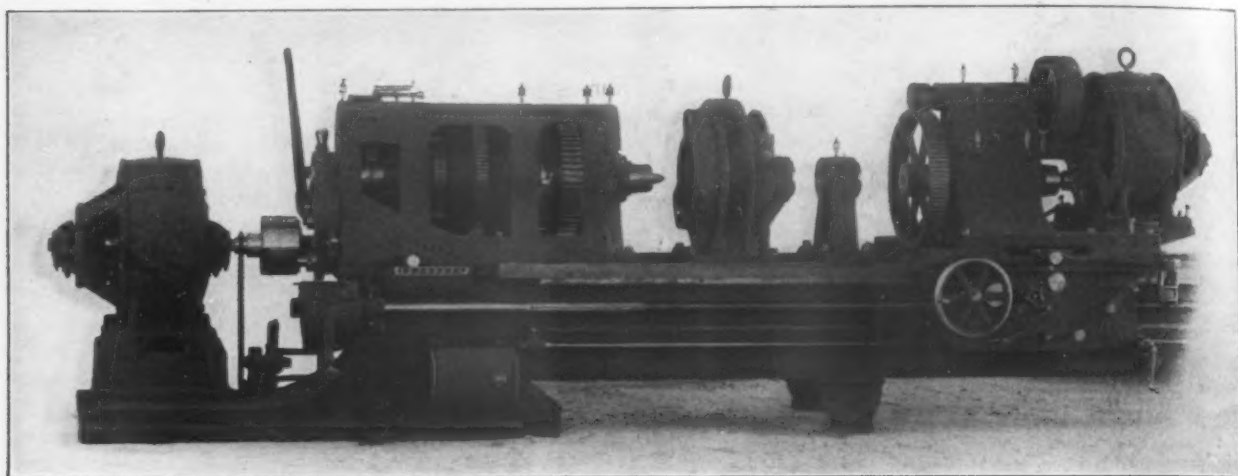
Front View of the Lathe with Gear Covers Removed.
